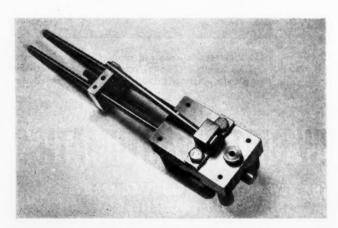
Becker Improved Jig for Drilling Cross-pin Holes
